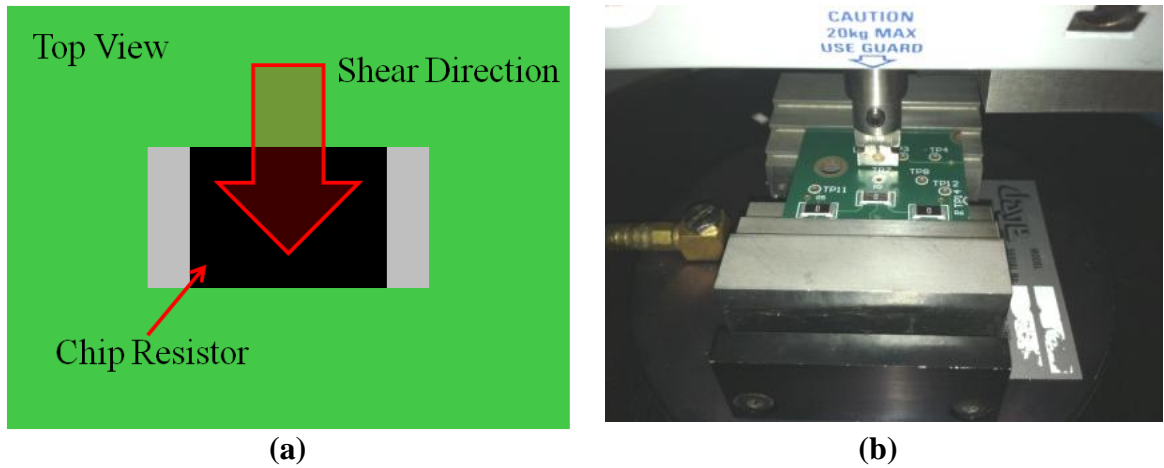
Shear set up, (a) shear direction diagram, (b) shear specimen in holder.
